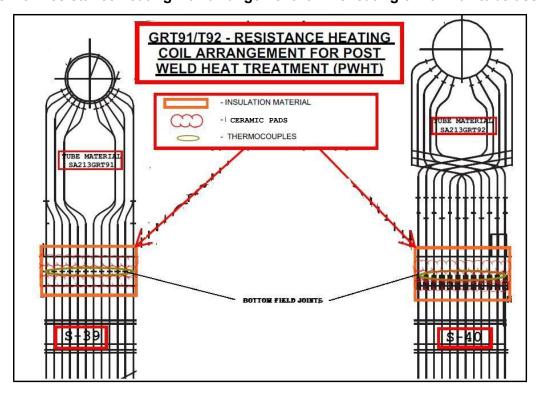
Resistance heating Coil arrangement for PWHT of T91/T92 tube assembly
